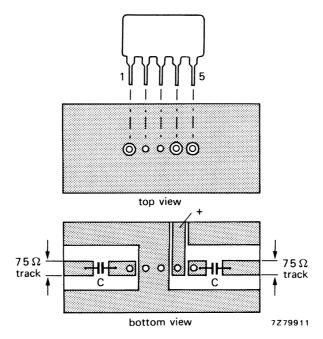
Printed-circuit board holes and tracks. C > 220 pF ceramic capacitor.
